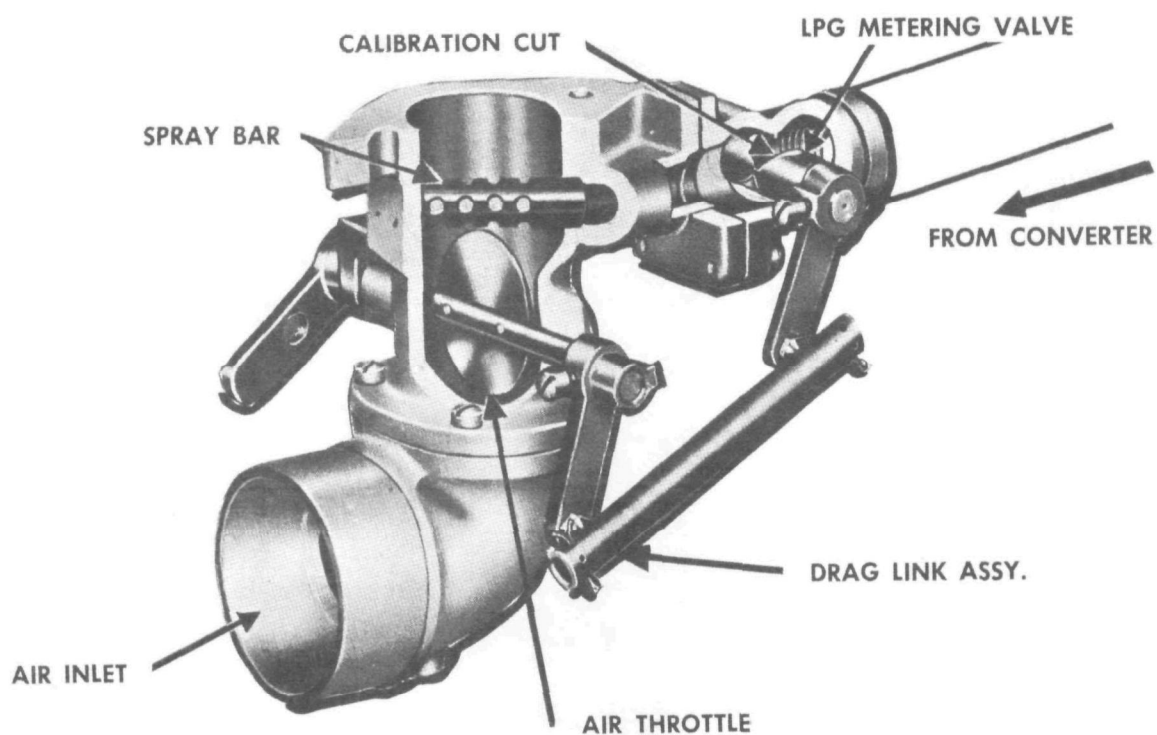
DEVICE 459 SINGLE-FUEL AIR VALVE CARBURETOR (REFERENCE 66)
